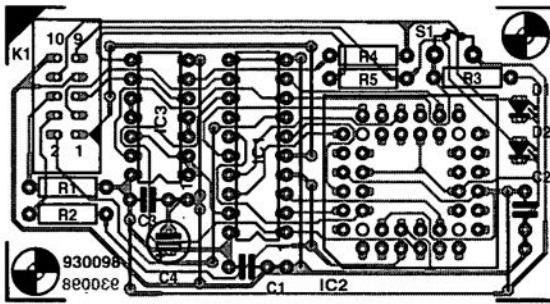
The PCB for the copybit eliminator is small enough to be built into the mother equipment.
